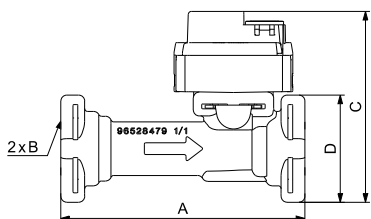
Dimensions, MFS 2-20 l/min, without adapter
